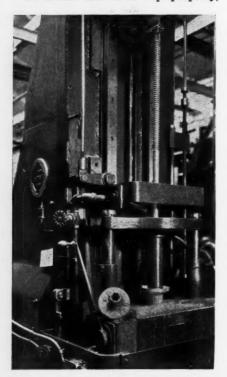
Vertical broaching machine with agitator drive cap in position for broaching splines. A finished cap can be seen at the left end of the fixture.
